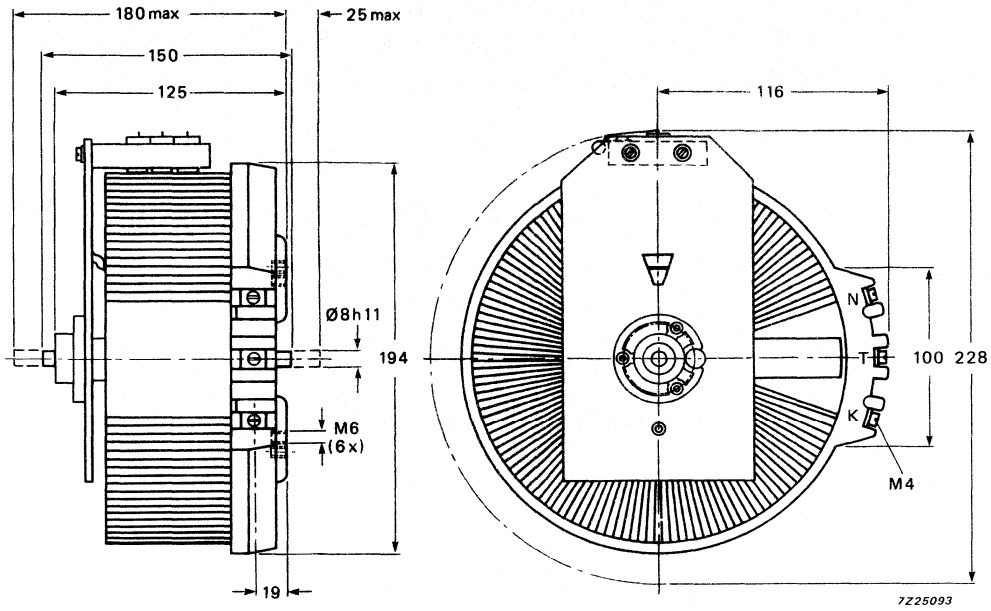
Transformers 2422 530 90067 and 2422 530 90072.
